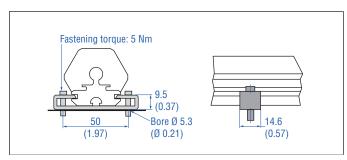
Mounting clamps (part no. 400 802) with cylinder screw M5×20
